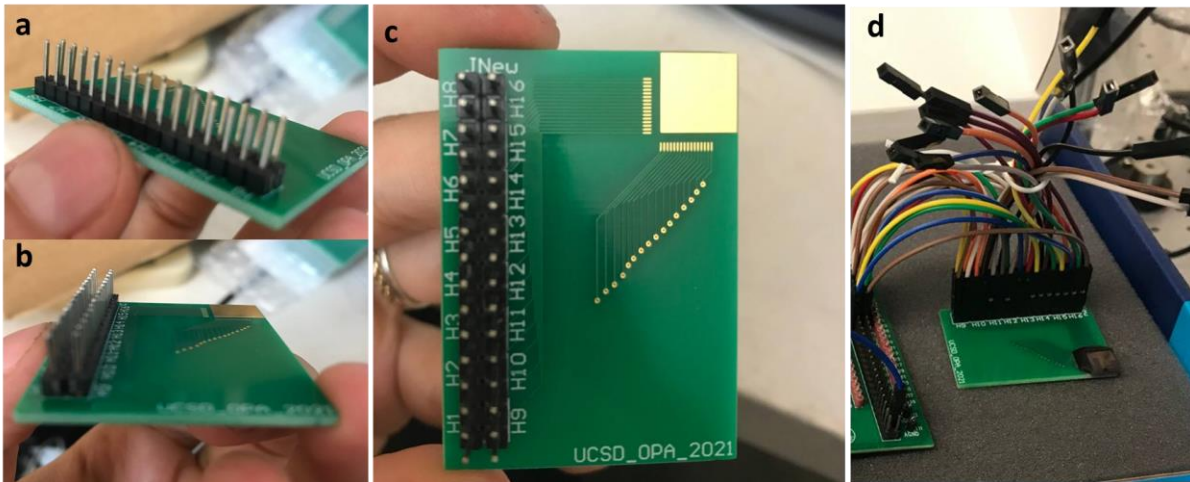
(a-c) Side and top views of the fabricated PCB with the connector attached (d) Jumper wires connection to the PCB for further connection to the microcontroller (DAC) board
